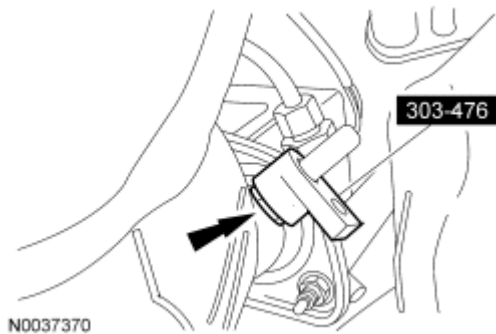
Heated Oxygen Sensor (HO2S) Special Tool
